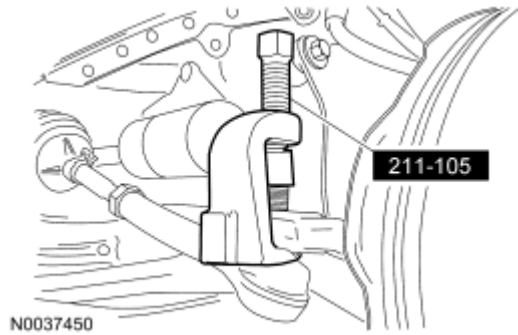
Separating Tie-Rod Ends From Wheel Knuckles Using Special Tool (211-105)
